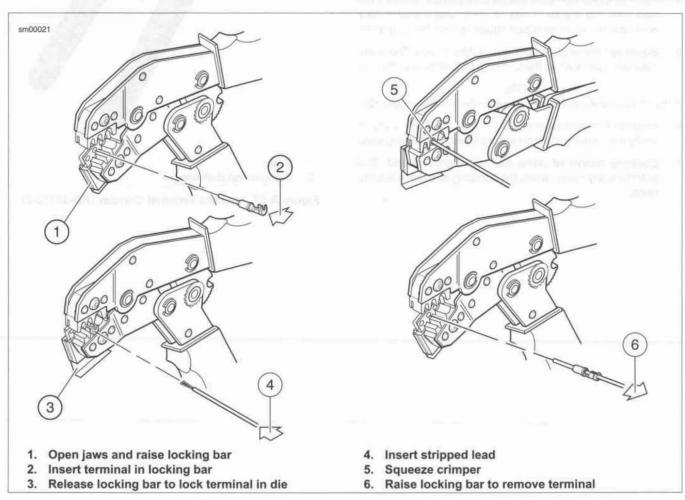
Crimping a Deutsch DT Sealed Terminal
